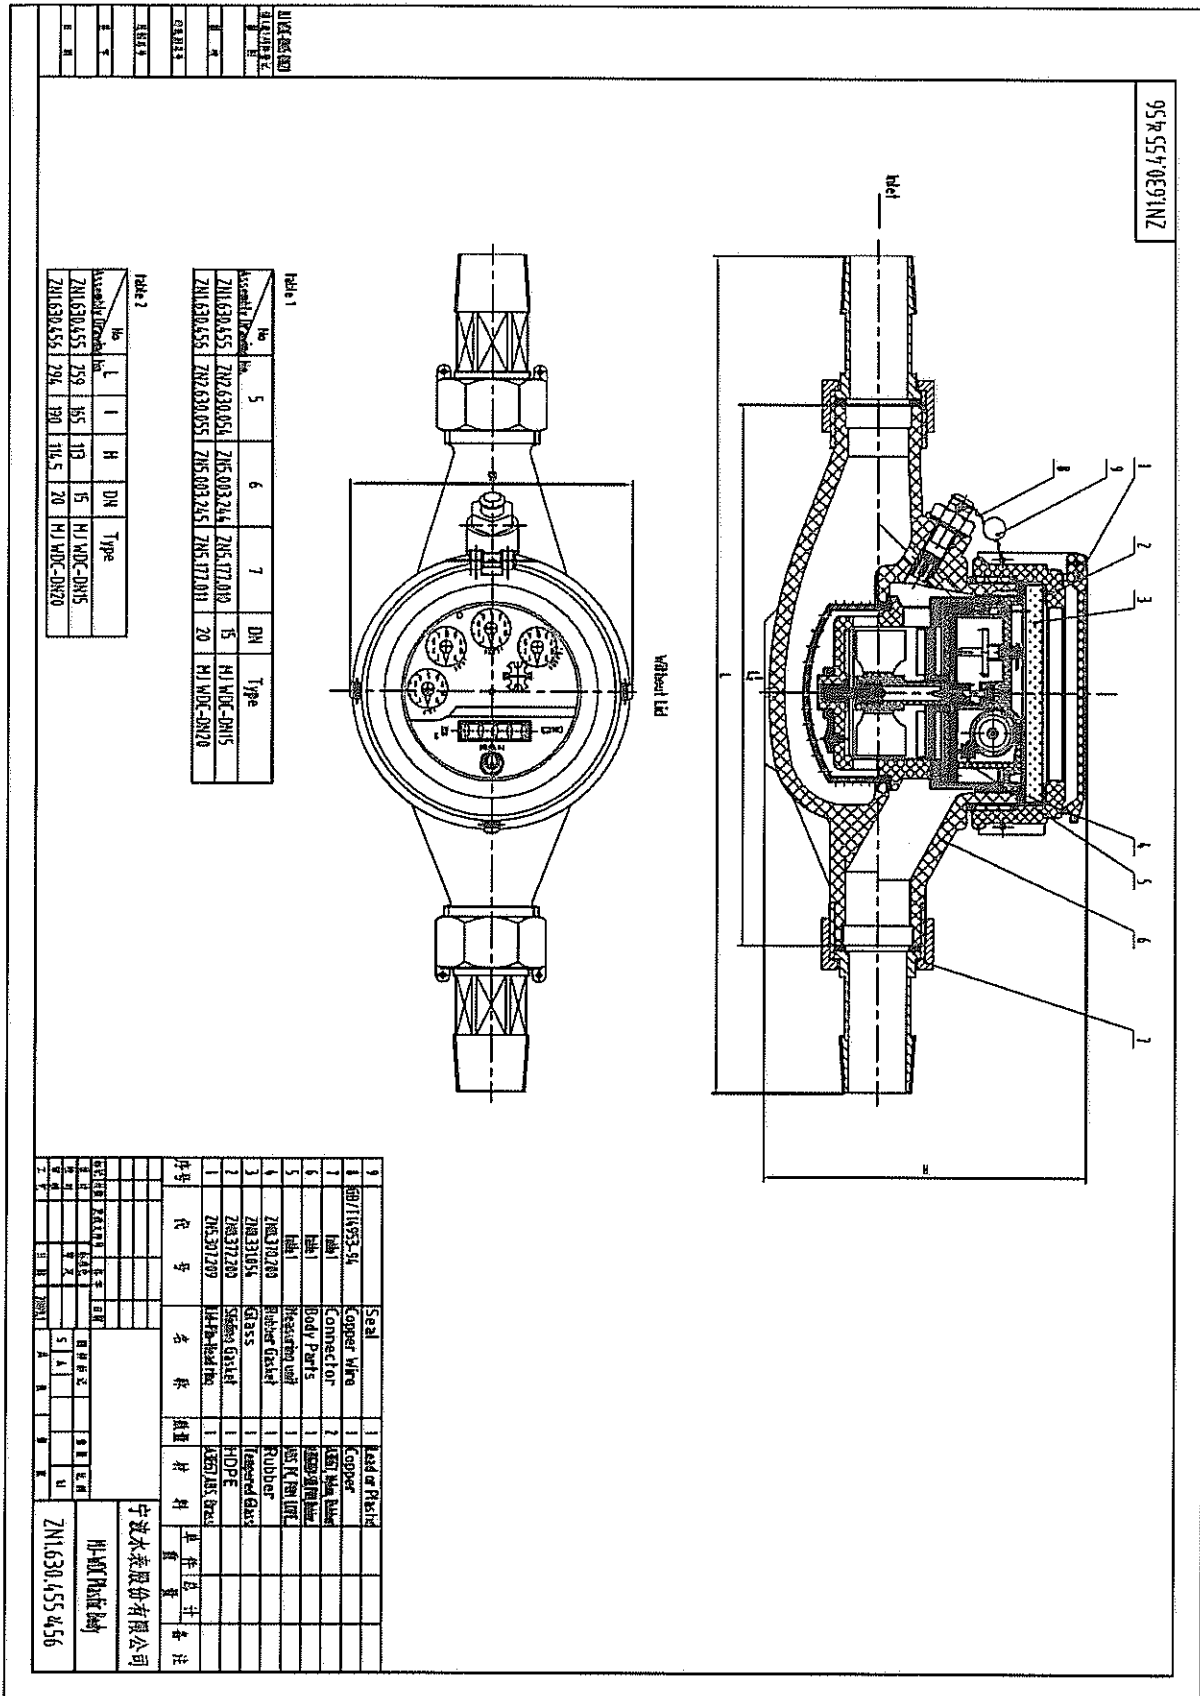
The water meter type MJ-LFC (F1) assembly drawings:
